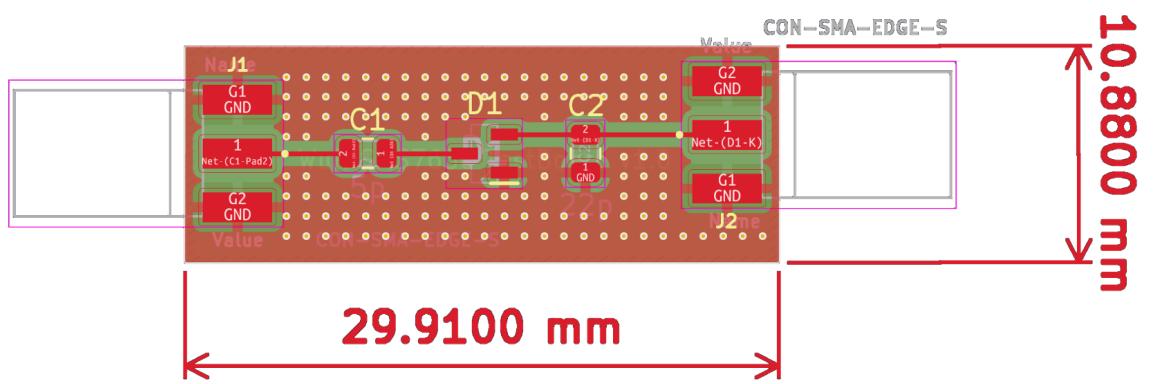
WuR Z-Parameter Prototyping Board Layout with SMS7630
